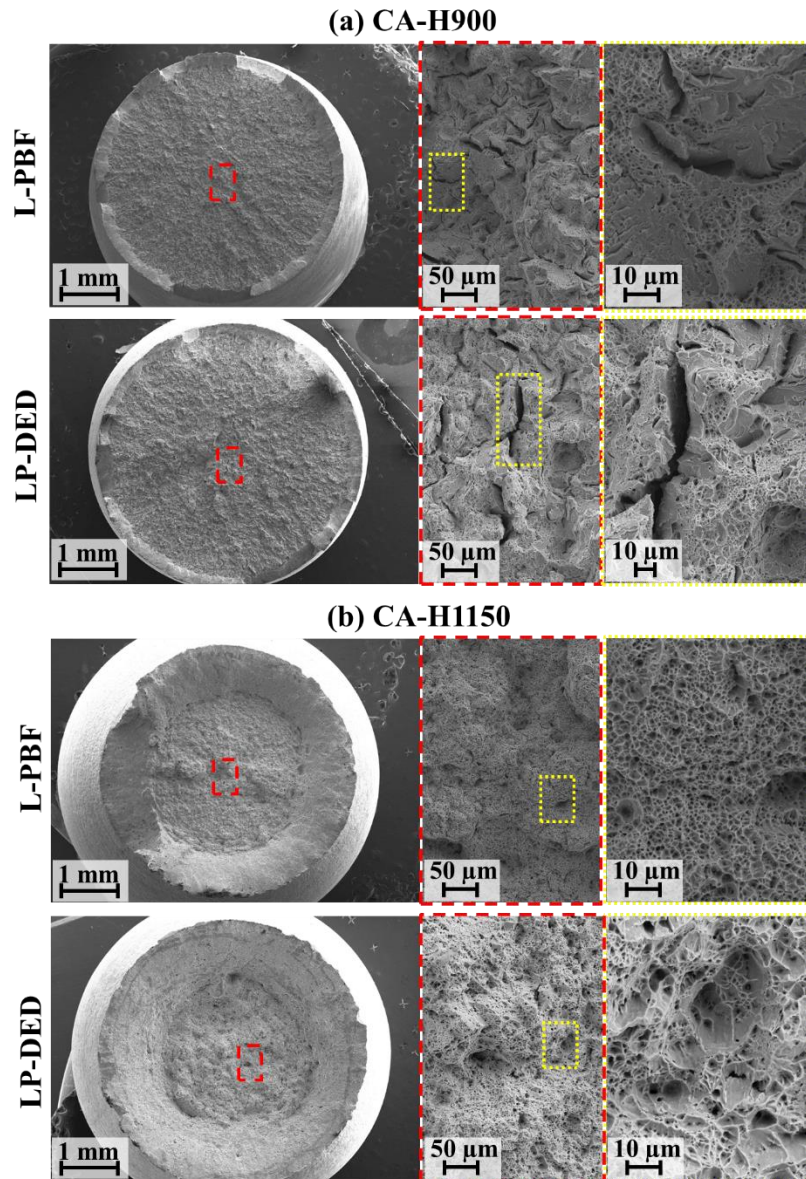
Tensile fracture surfaces of the L-PBF and LP-DED 17-4 PH SS specimens: (a) CA-H900, and (b) CA-H1150.
